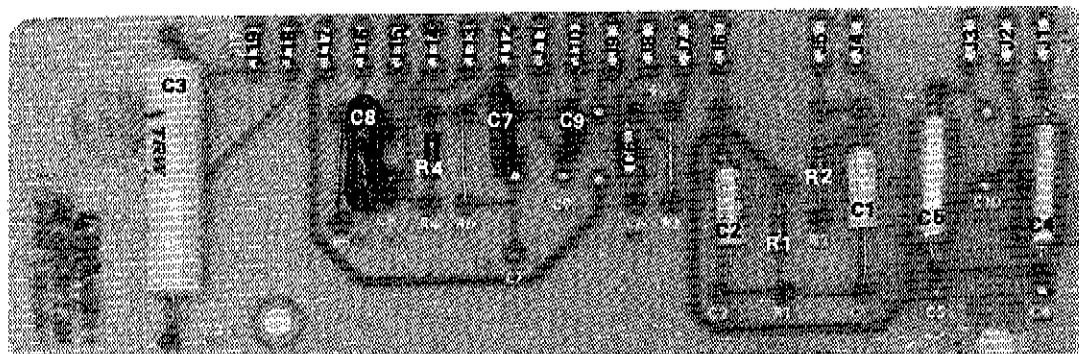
PCB ASSEMBLY, 400 Hz (-04 Option)
